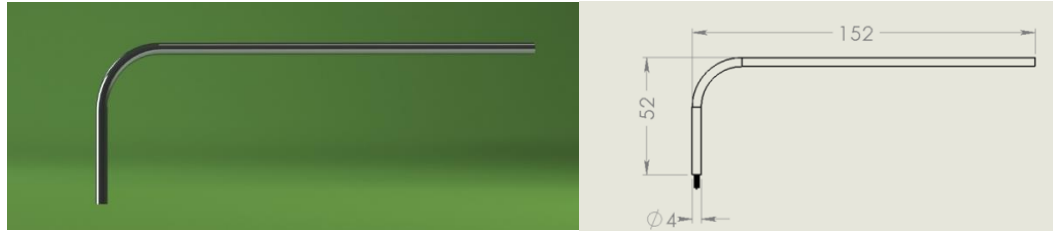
The L-shape stainless steel tube that has been used as probe housing.
